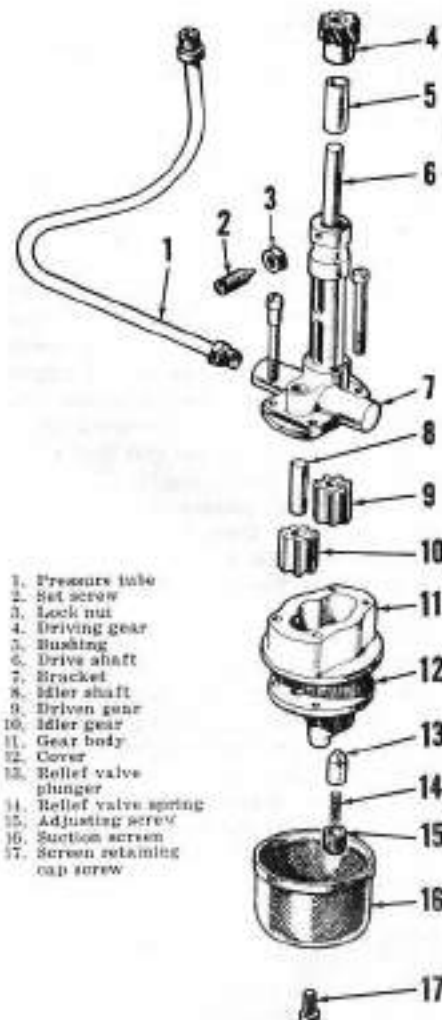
Exploded view of oil pump used on models 990 and 1200. Adjusting screw is secured by wire through hole in cover (12) and slot in adjusting screw.
